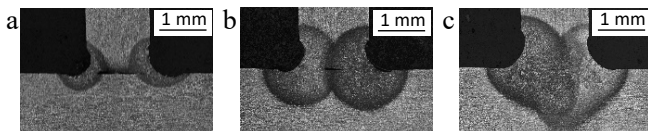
Cross section of the weld beads: (a) 500 W and 500 mm/min; (b) 700 W and 900 mm/min; (c) 900 W and 1100 mm/min.
